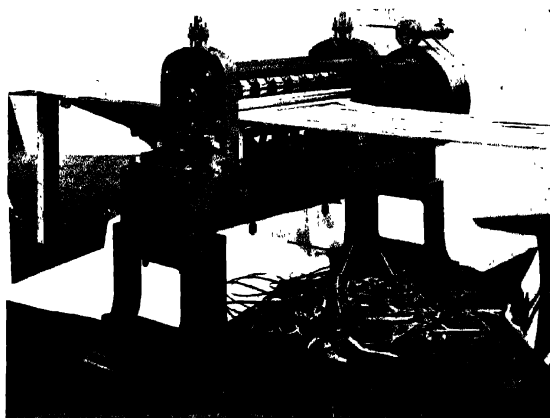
Gang-slitting machine having independently adjustable cutters
